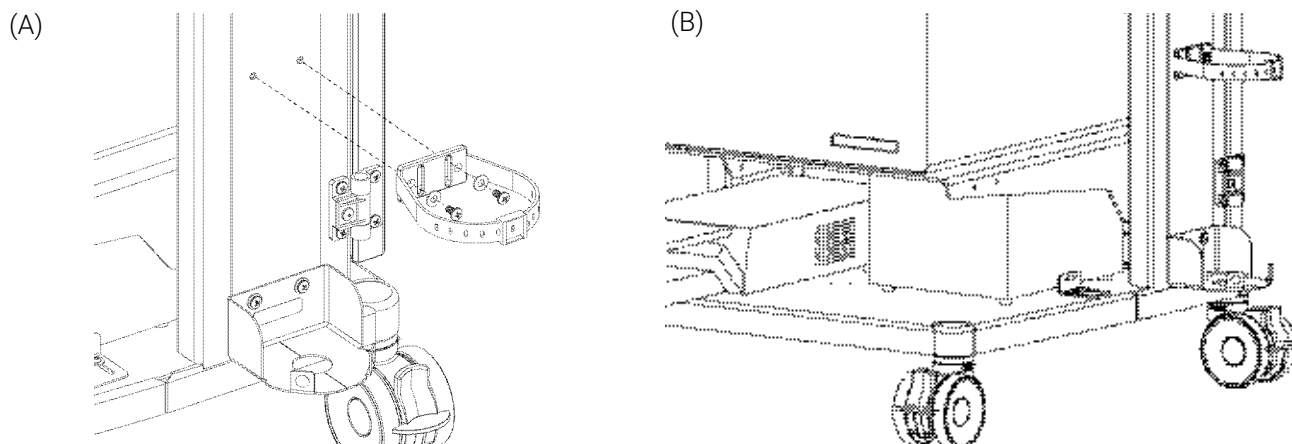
Cable management panel - screw removal for the gas cylinder mounting bracket
